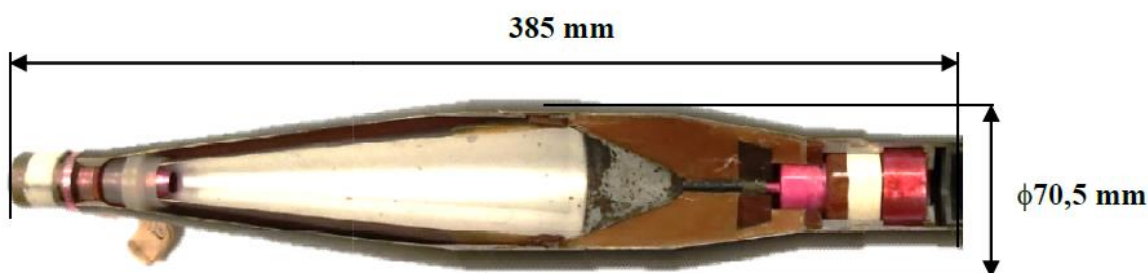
Shaped charge warhead PG-7W (MIAT)
